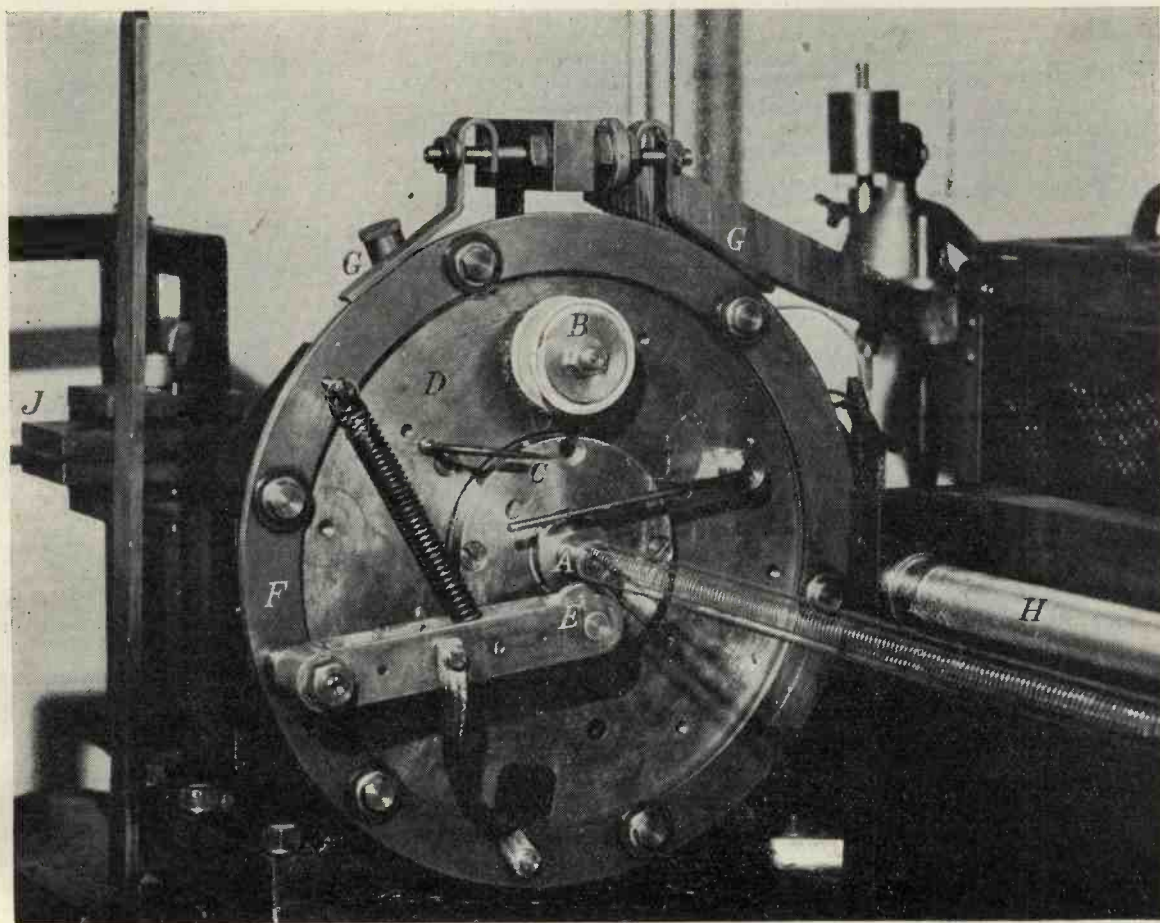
Close-up of the grid winding machine showing grid wound in a continuous length.
